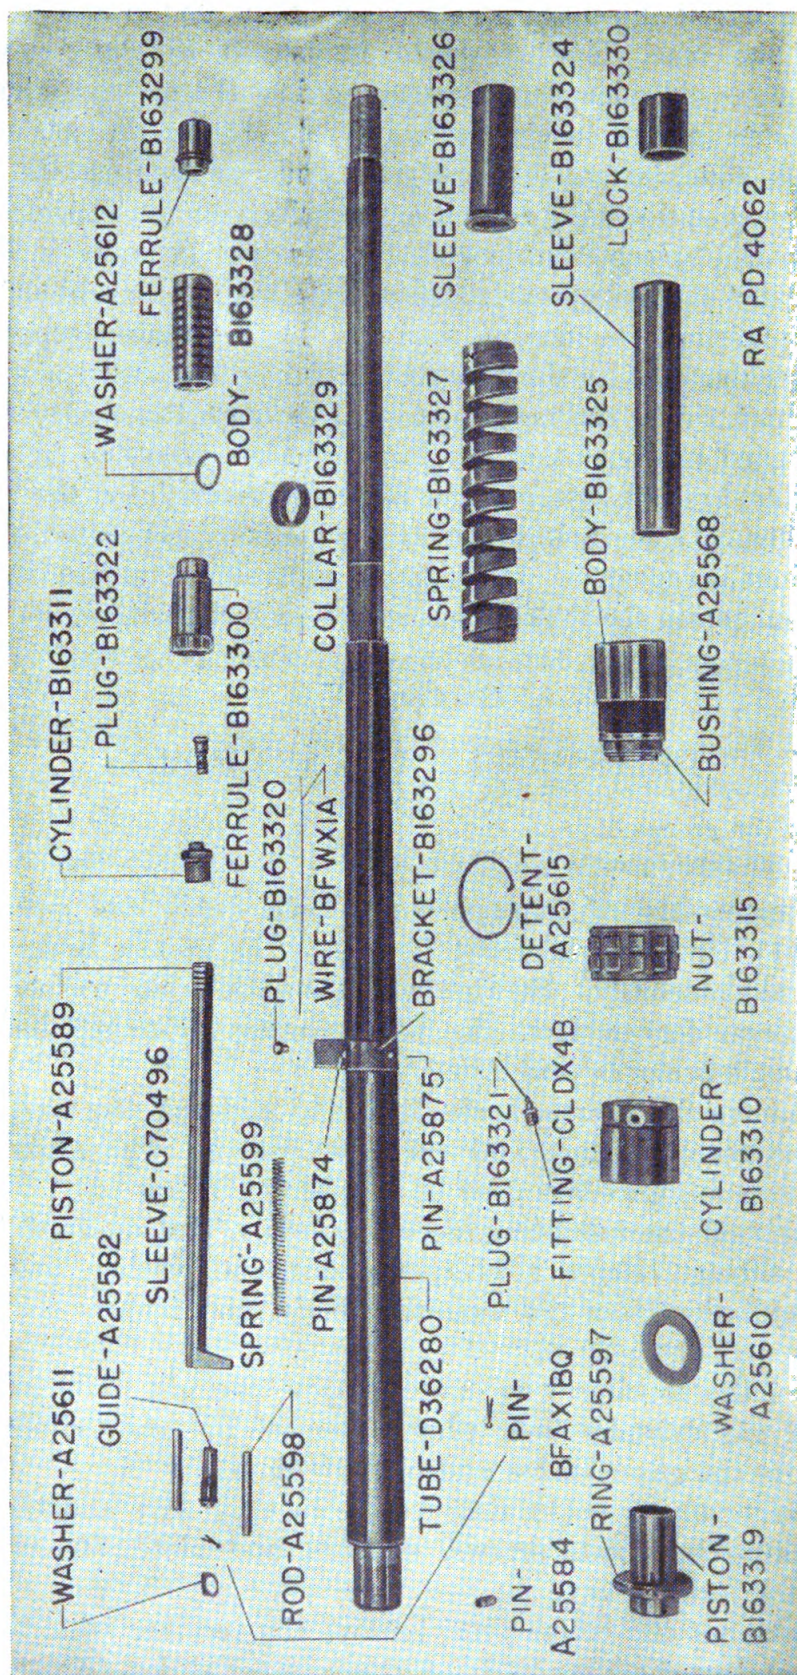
20-mm automatic gun M2, barrel, muzzle brake, and gas cylinder group parts with locking collar.
